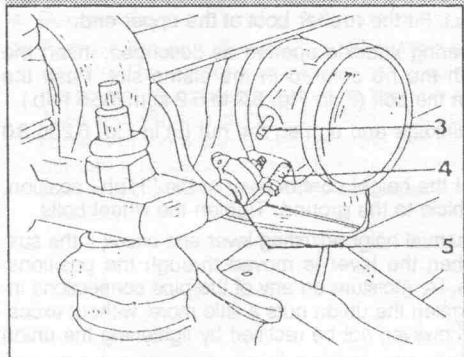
Details for the removal and installation of a front height corrector.
